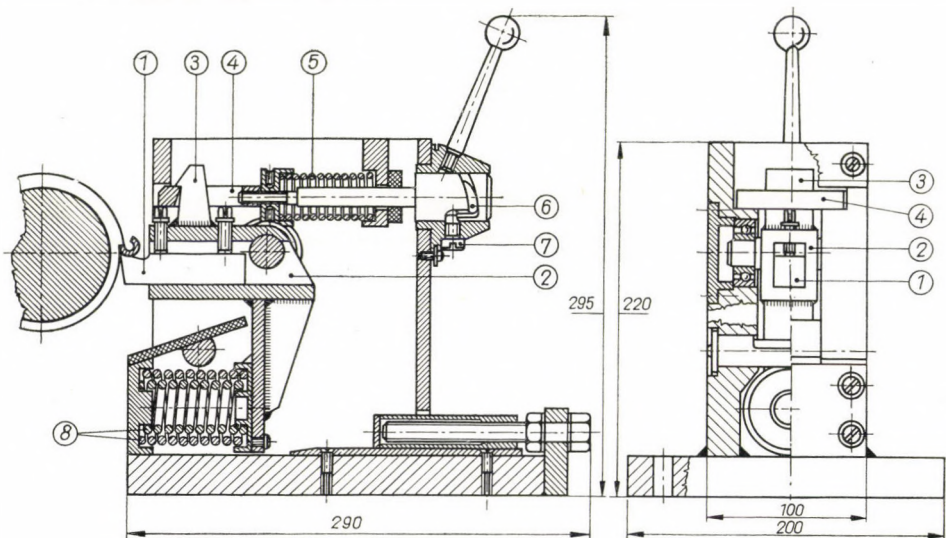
New type of break off apparatus, developed at the Department of Technology of Machine Production, Technical University Budapest
